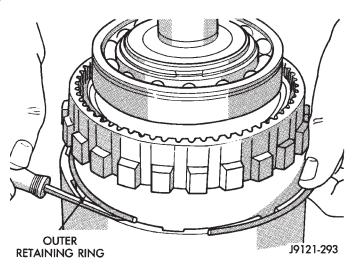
Removing Clutch Drum Outer Retaining Ring
